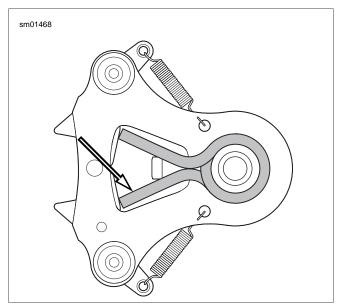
Shifter Shaft Return Spring (Incorrectly Installed)
